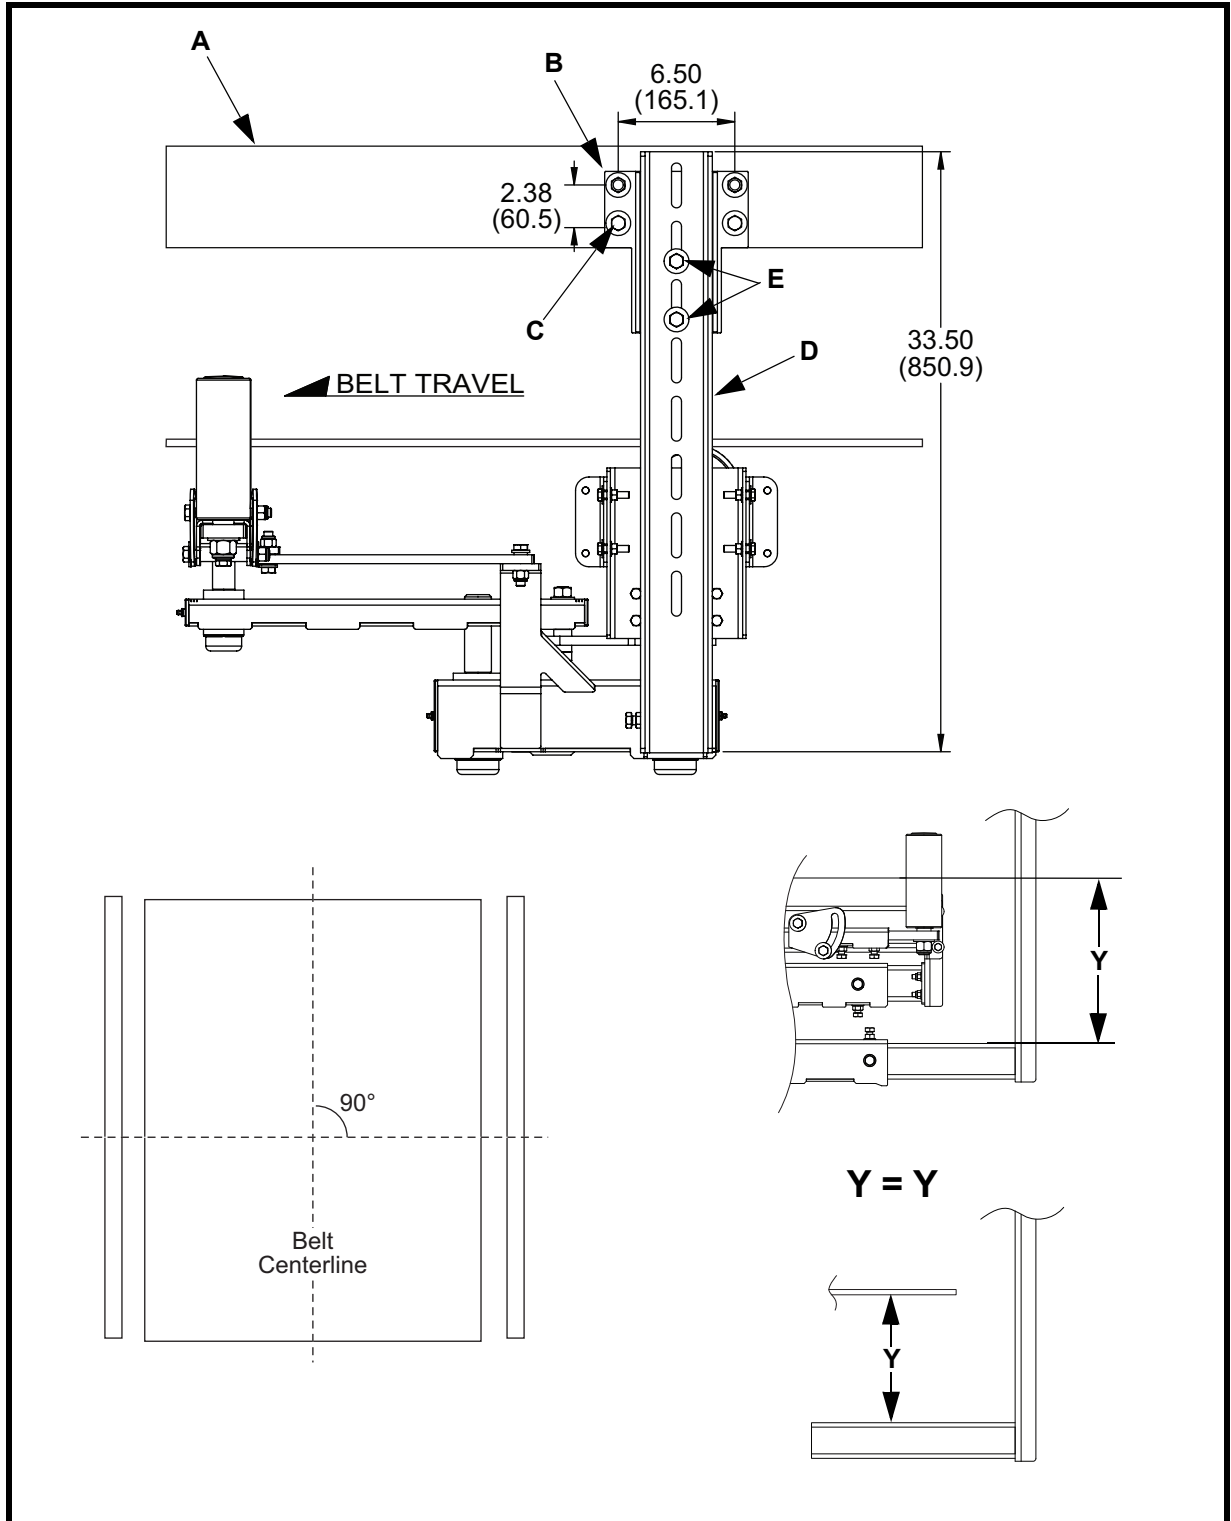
Mounting Dimensions–Martin® Tracker™ HD (Lower Unit)
